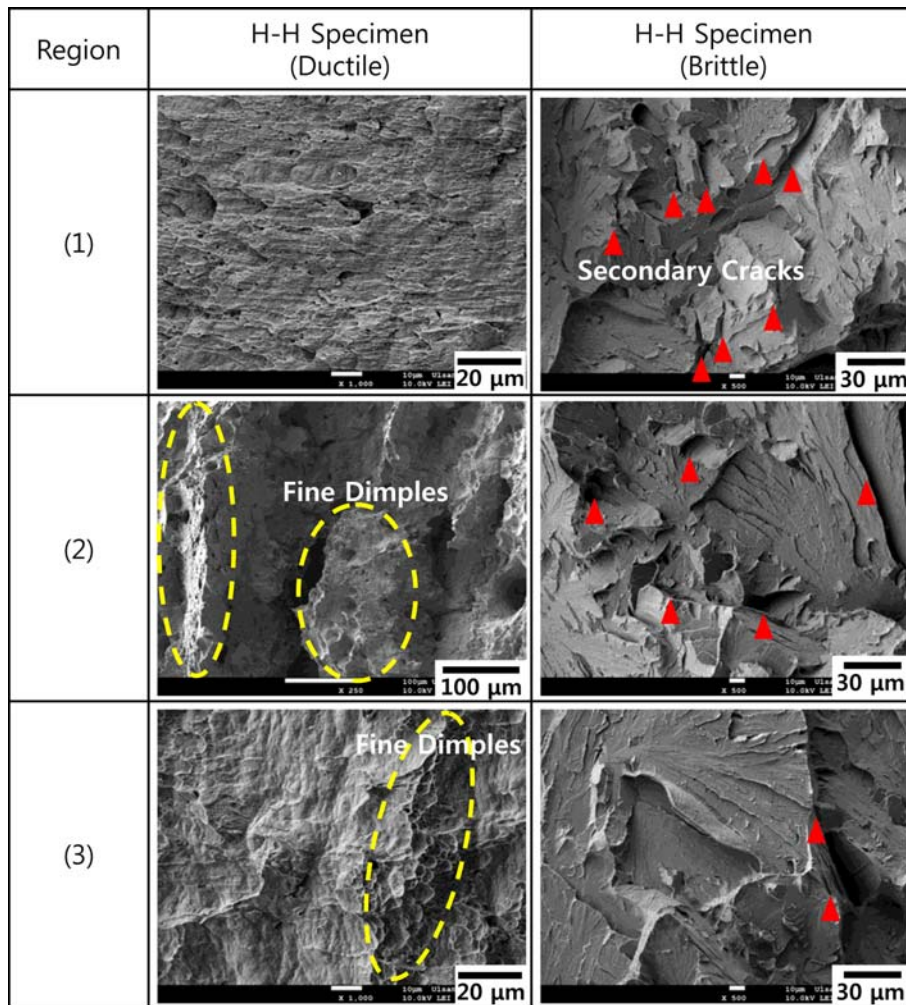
SEM fractographs of the fractured Charpy impact tests at -40 °C for the H-H specimens.
